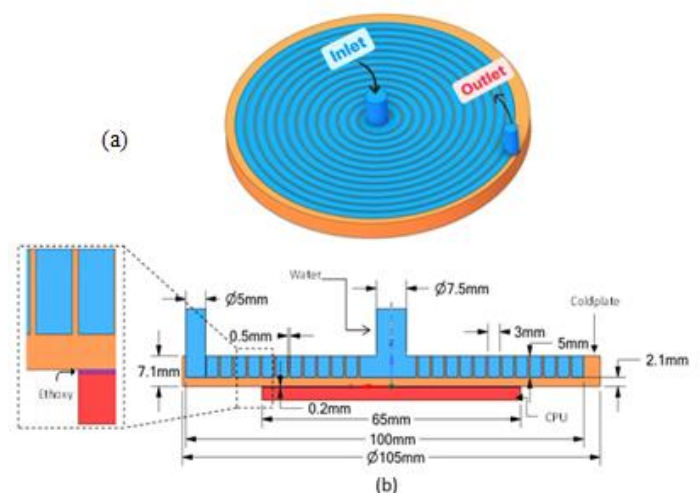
Archimedean Spiral channel heat sink (a) 3D view (b) cross-section view
